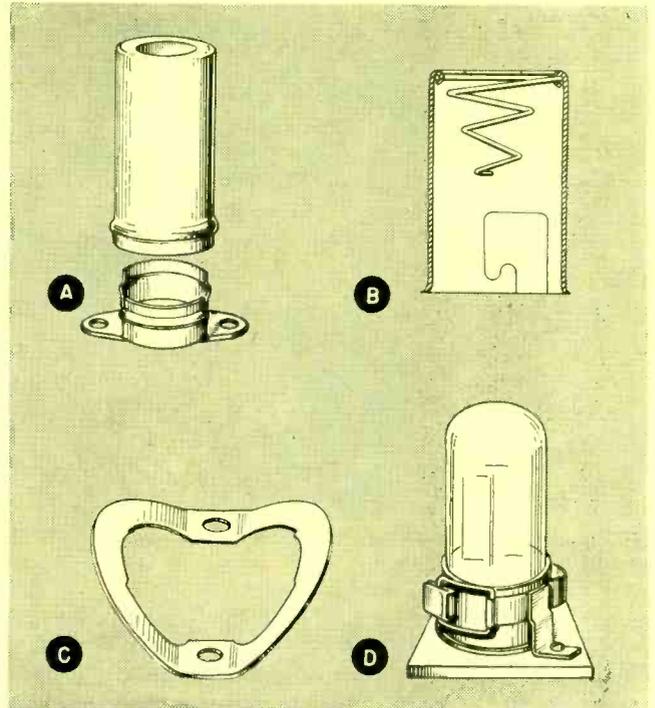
Bayonet (A) and bead (B) type tube shields; also ring (C) and collar (D) type tube clamps
